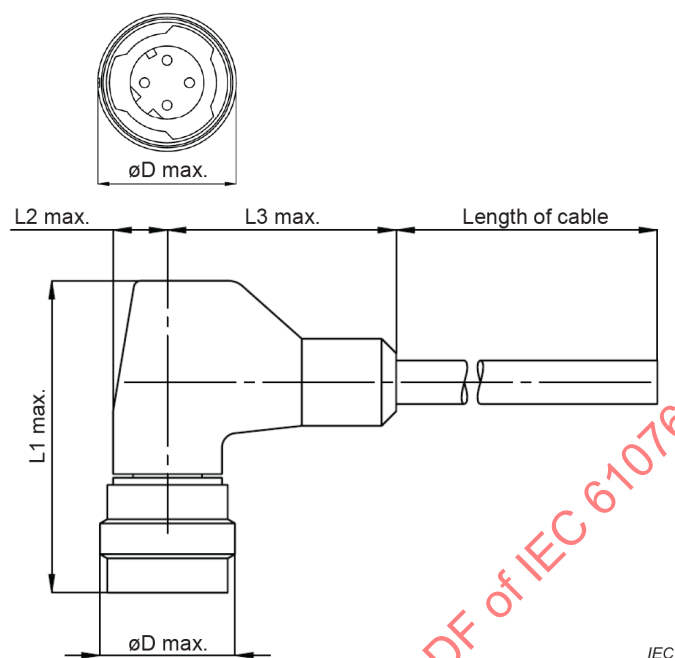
Style NF_M12_PPI – Non-rewirable connector, female contacts, right angled higher version, with inner push-pull and screw locking
